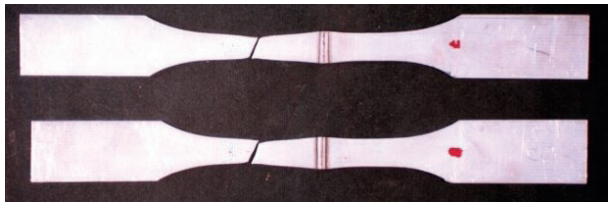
A view of the broken samples from the tensile tests of the butt joint J1 welded at 1.0 kW and welding speed of 4.0 m/min (heat input of 15 J/mm, Table 4)
